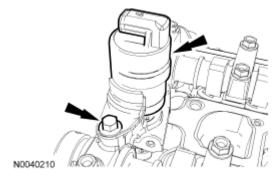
Locating Variable Camshaft Timing (VCT) Solenoid And Bolt Courtesy of FORD MOTOR CO.
